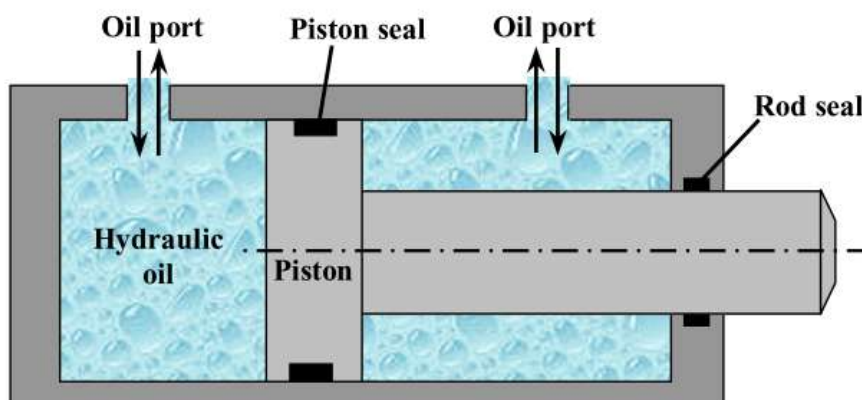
Hydraulic seals in a linear hydraulic actuator.
